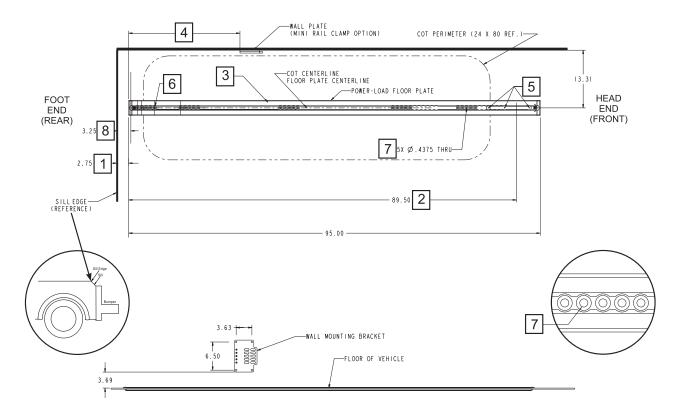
Power-LOAD Floor Plate with Standard Wall Mount Cot Fastener Wall Plate (Optional)
